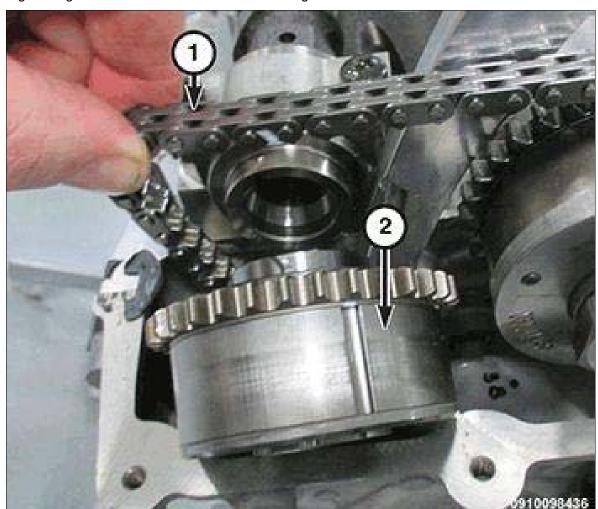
Right Side Exhaust Cam Phaser & Timing Chain
